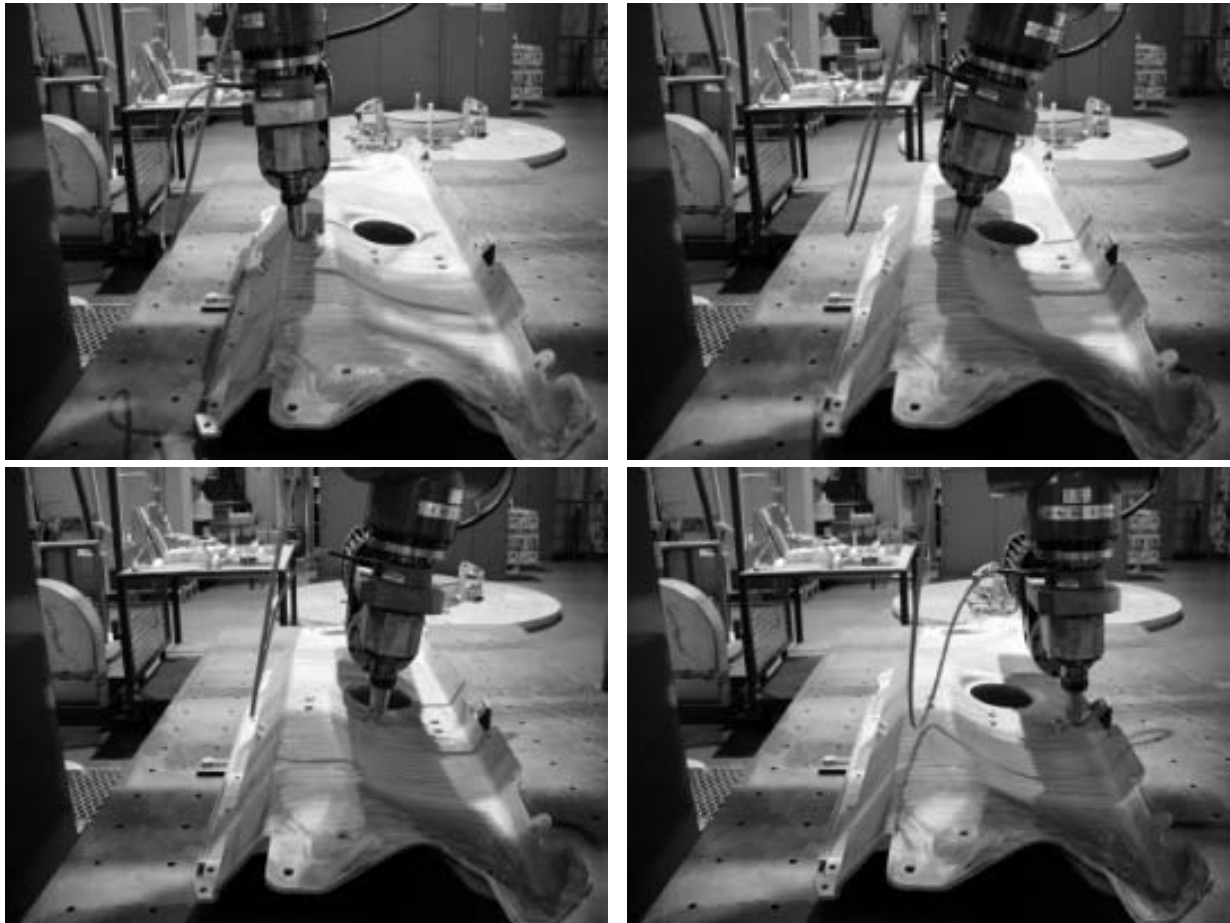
Robotic friction stir welding of an AM60 component
